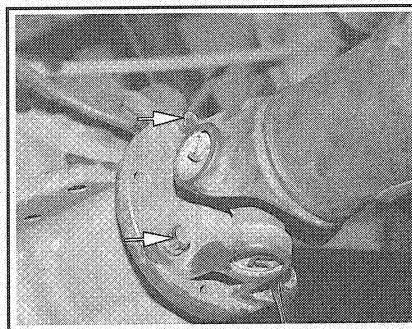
Remove the bolts retaining the rear driveshaft yoke-to-differential flange
